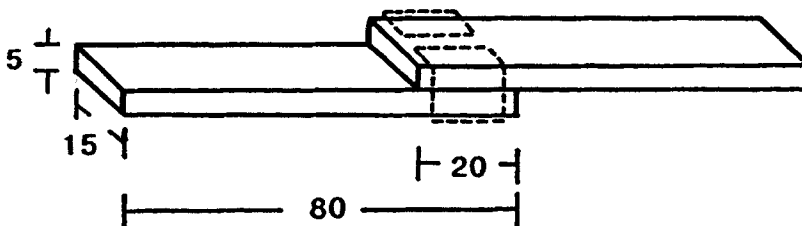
Single lap joint test specimen (all dimensions in mm).
